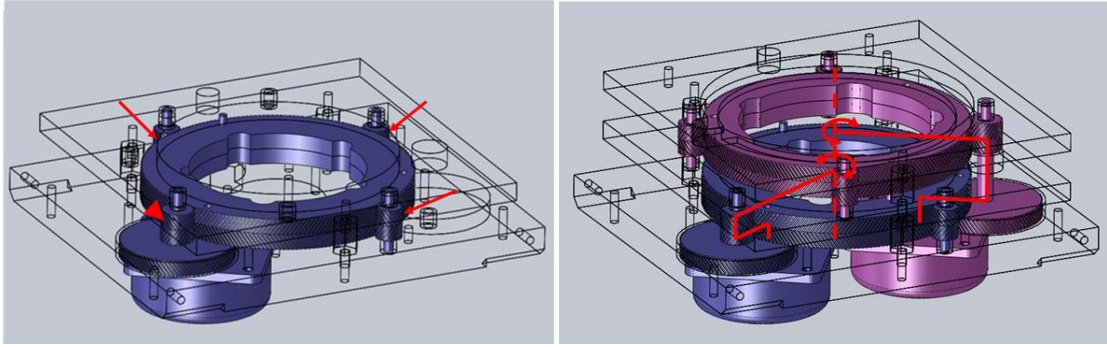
Endoscope tip steering wheel drivetrains. Three idler gears (arrows, left) and a drive gear (arrowhead, left) are used to mount the large central gears concentrically. Each tip steering wheel is actuated by a dedicated motor via a two stage drivetrain (right).
